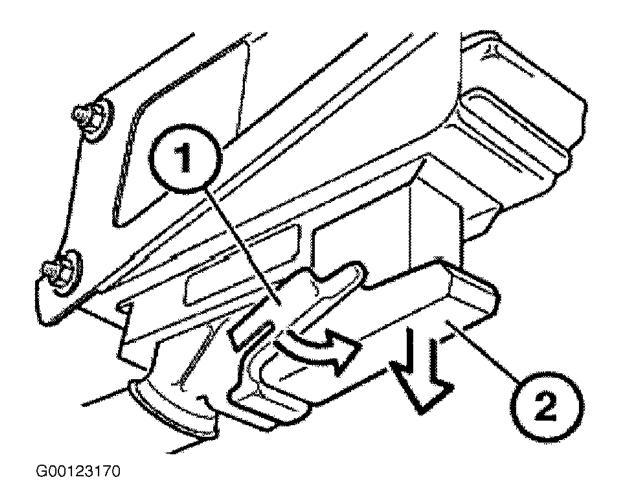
Unlocking Control Unit Connector Courtesy of BMW OF NORTH AMERICA, INC.
